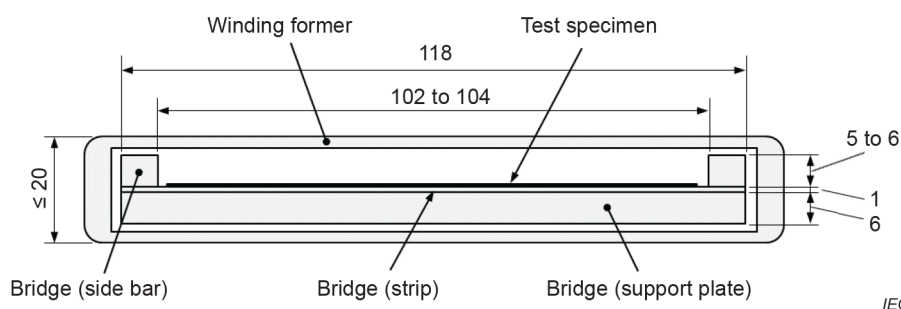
Cross-section of the winding former and the bridge (schematic)
